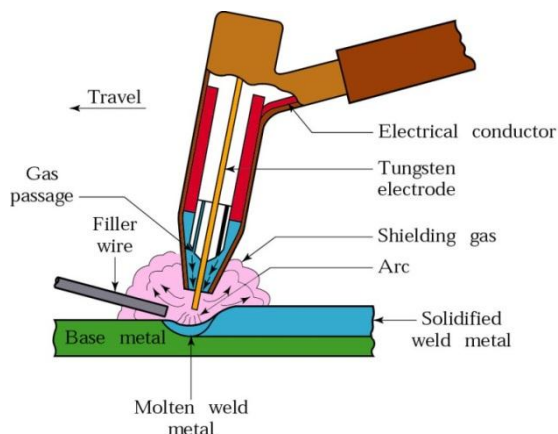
TIG Welding Process (Serope Kalpakjian, 2006)
